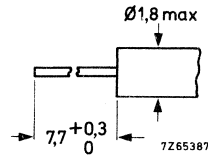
Wire diameter greater than 1 mm (max. 1,8 mm).
